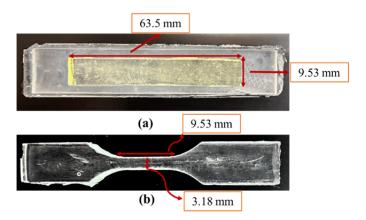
Geometrical representation of (a) beam specimen in the silicone mold and (b) type V standard tensile specimen fabricated after trimming the beam specimen using waterjet cutting.
